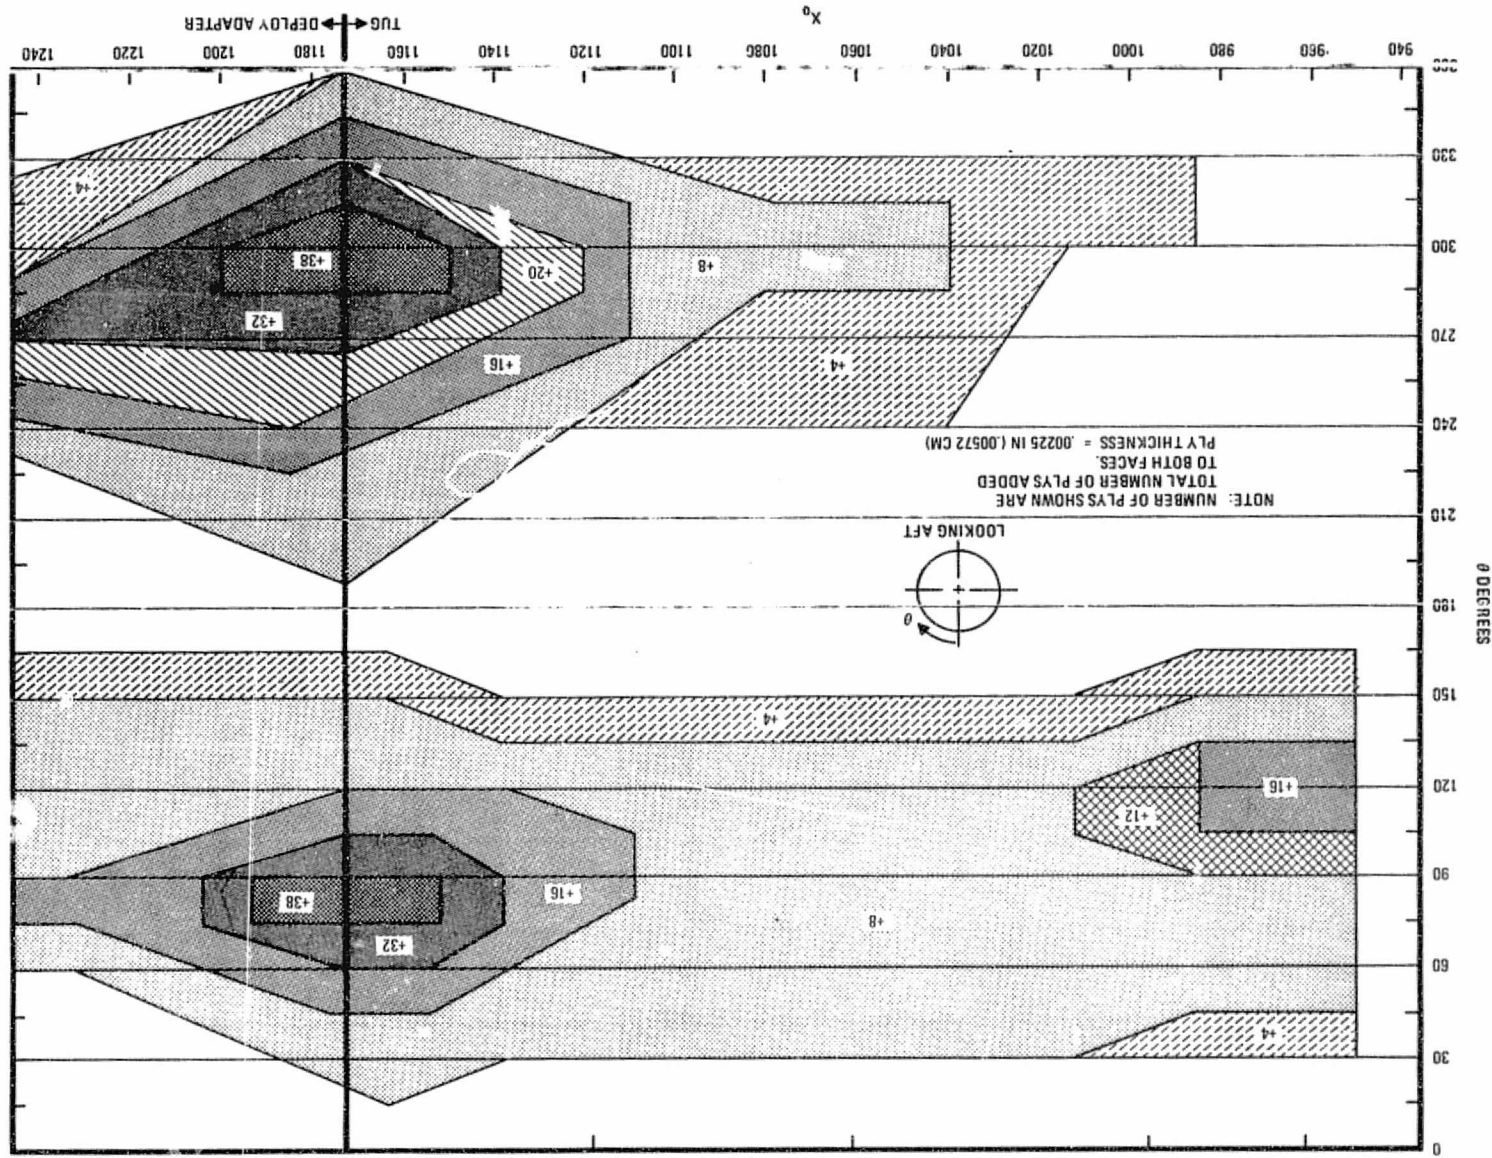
Tug Body Sidewall Reinforcement, Configuration 1-1
